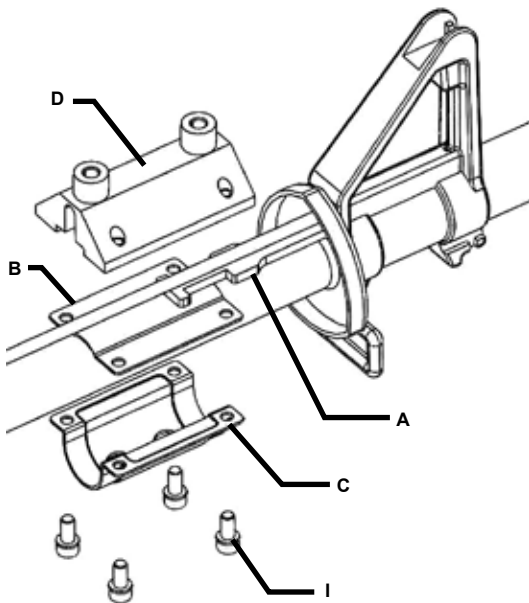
NVEC#16 Installation, Steps 1-6 Exploded
